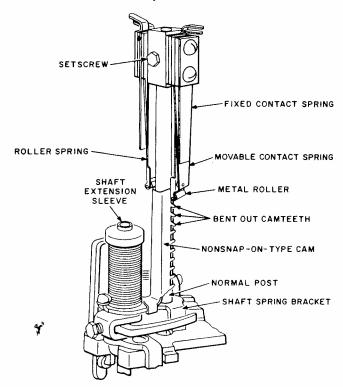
Normal Post Spring Assembly Having Metal Rollers Operated by Nonsnap-On-Type Cam
